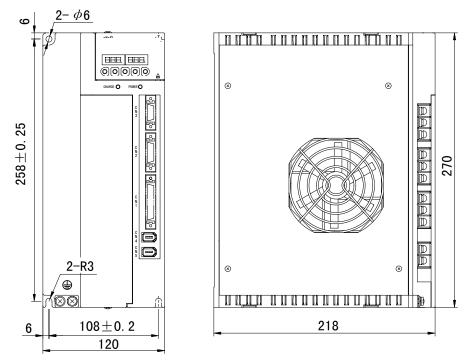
GS3050, GS4050 Series installation dimension (Unit: mm)
